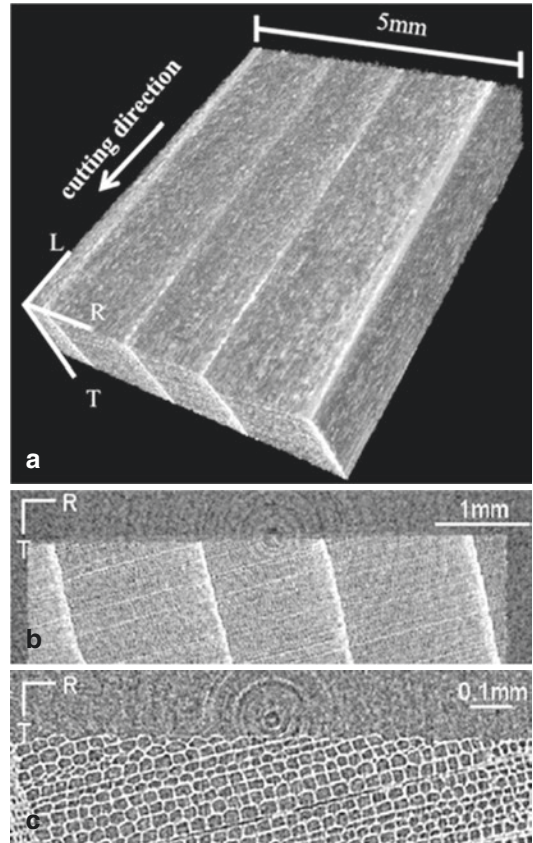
CT images of the machined workpiece obtained by type 0 chip formation. Cutting angle was 30° and depth of cut was 0.1 mm. (a) 3D view of the workpiece. (b, c) cross-sectional view (RT plane) of the workpiece [7]
